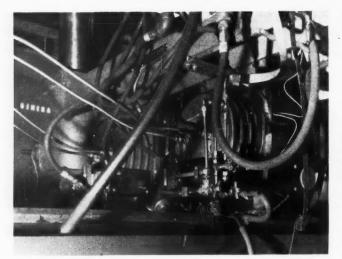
The specially designed heating coil head is equipped with a set of guide rollers which rides on the
